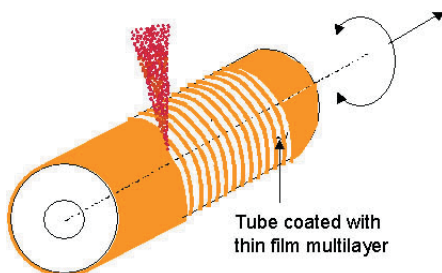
Focused ion beam lathe process for fabricating microscale coils.
